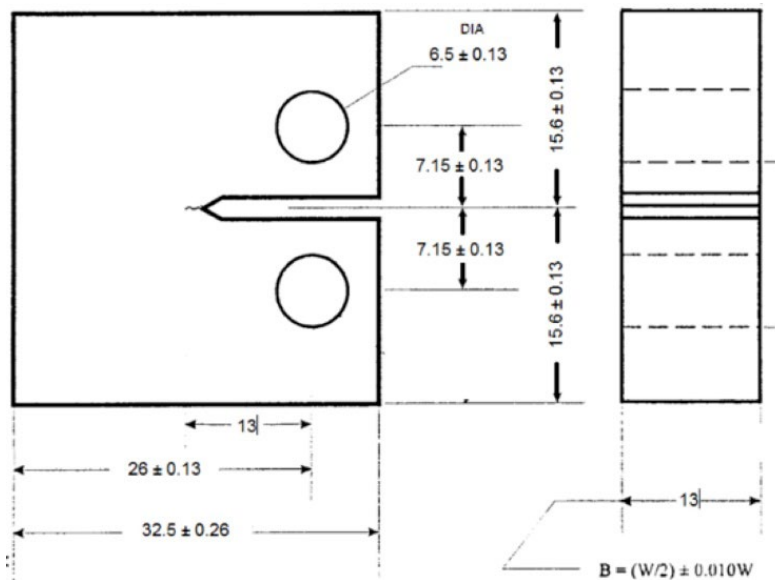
Compact tension (CT) specimen (dimensions in mm)
